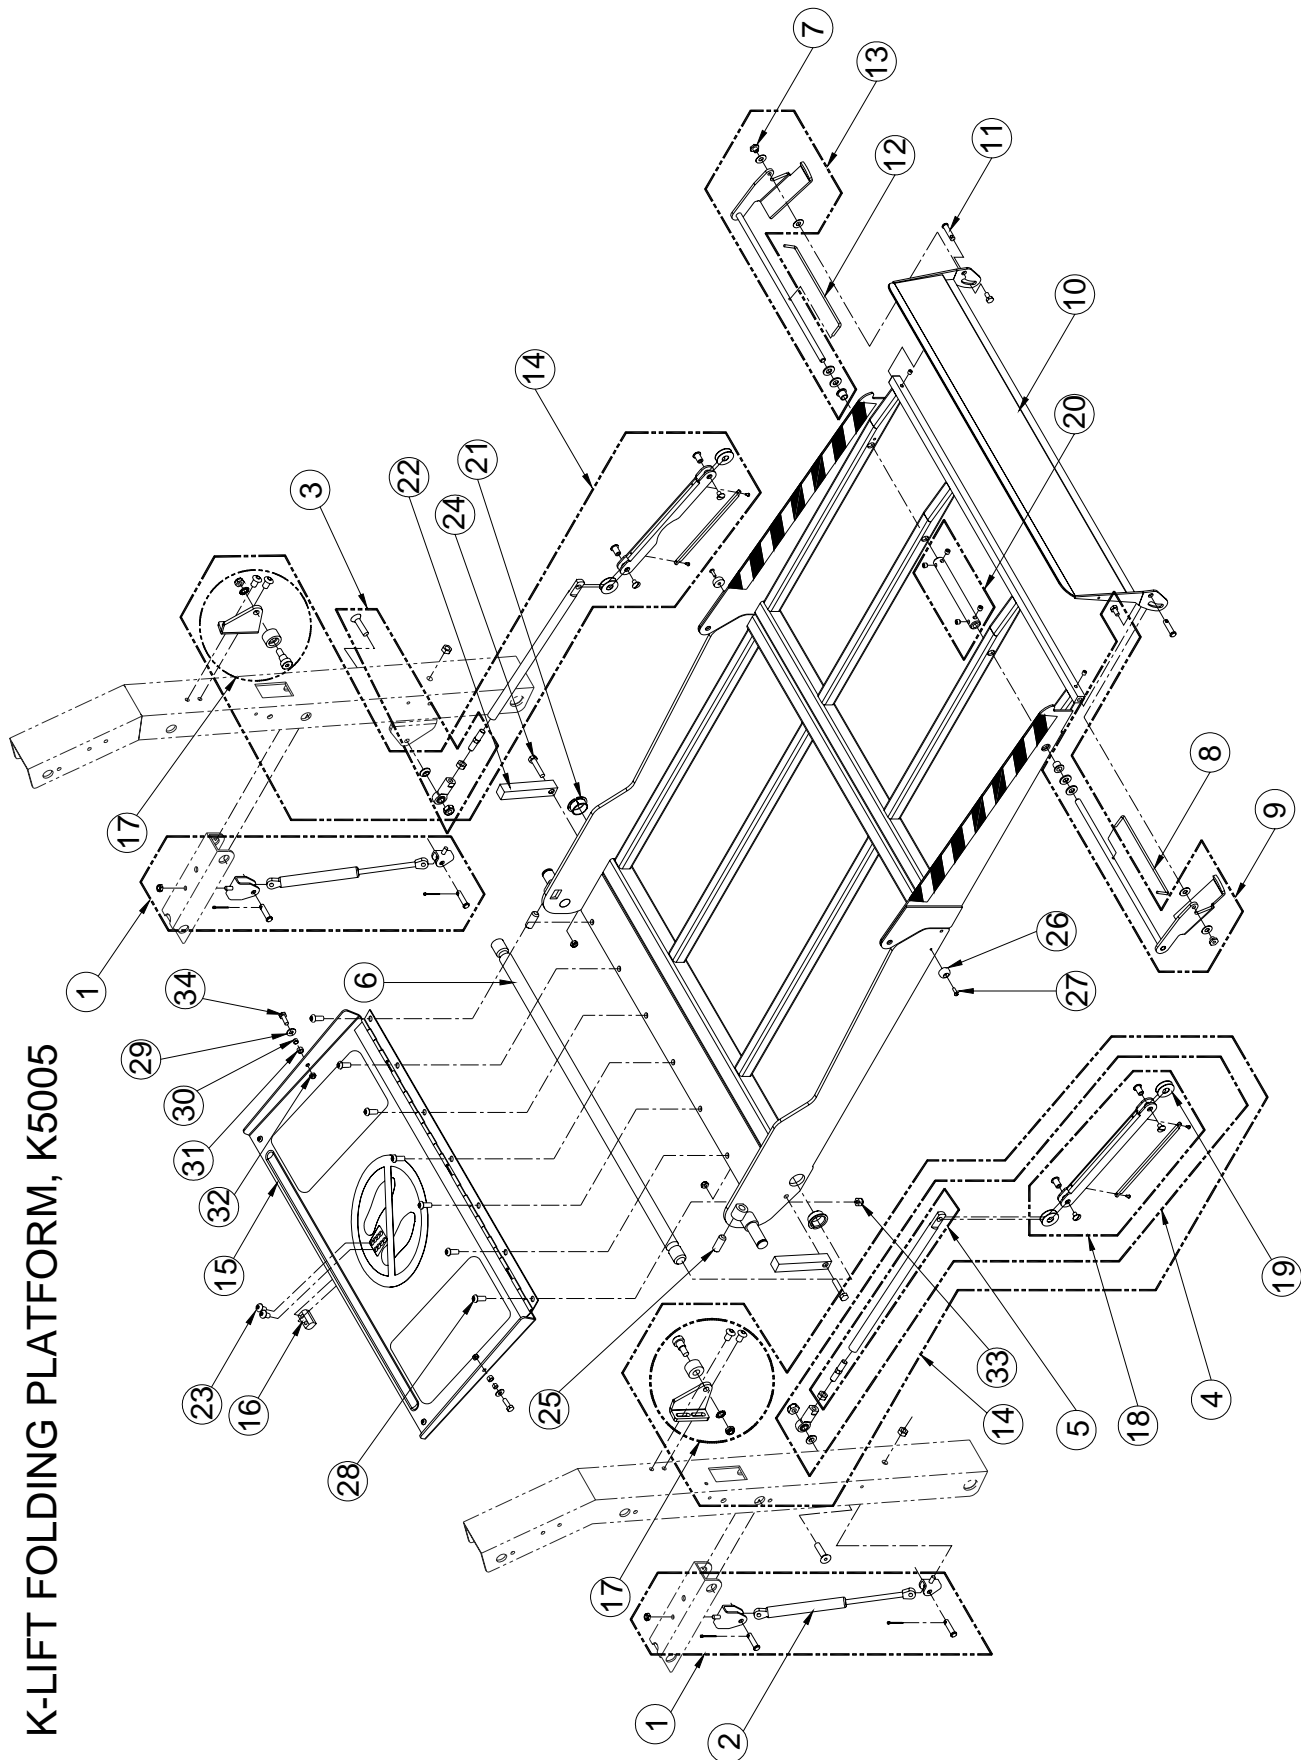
FOLDING PLATFORM ASSEMBLY, K5005
